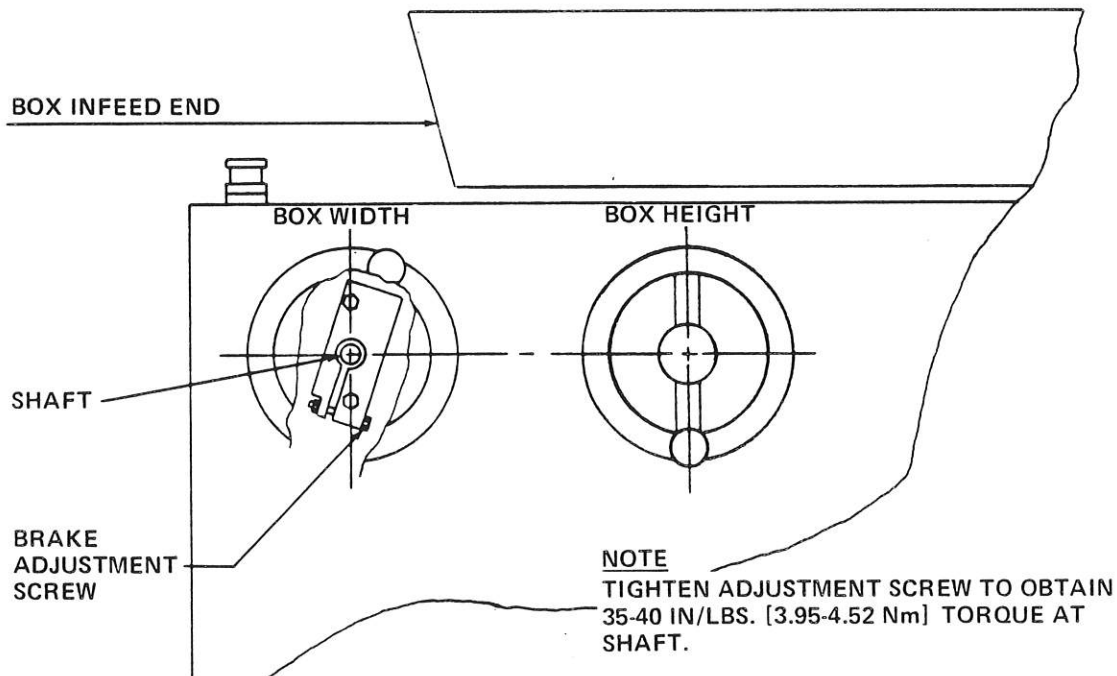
A - WIDTH BRAKE HOLDING FORCE (Right Side View)
